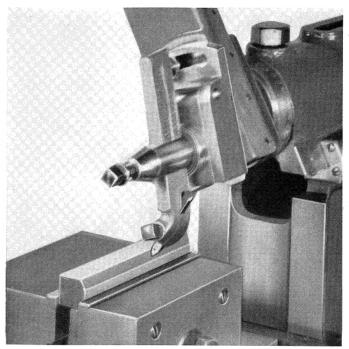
Angular Cut on Edge of Piece of Work and Showing Tool Head and Holder.
